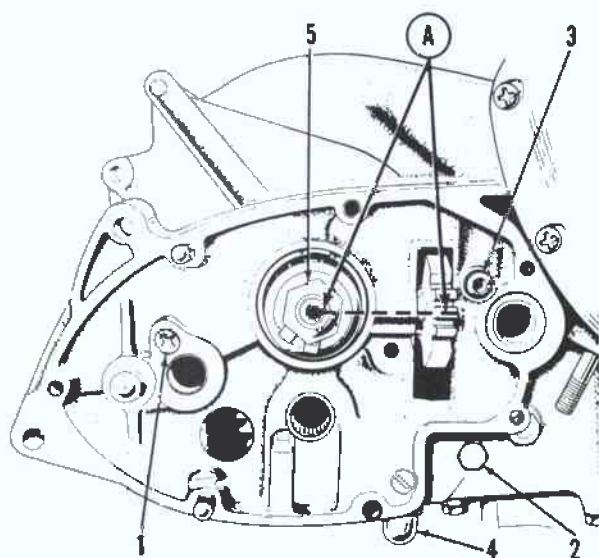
View of the gear box inner cover installed. Refer to text for removal procedure.
